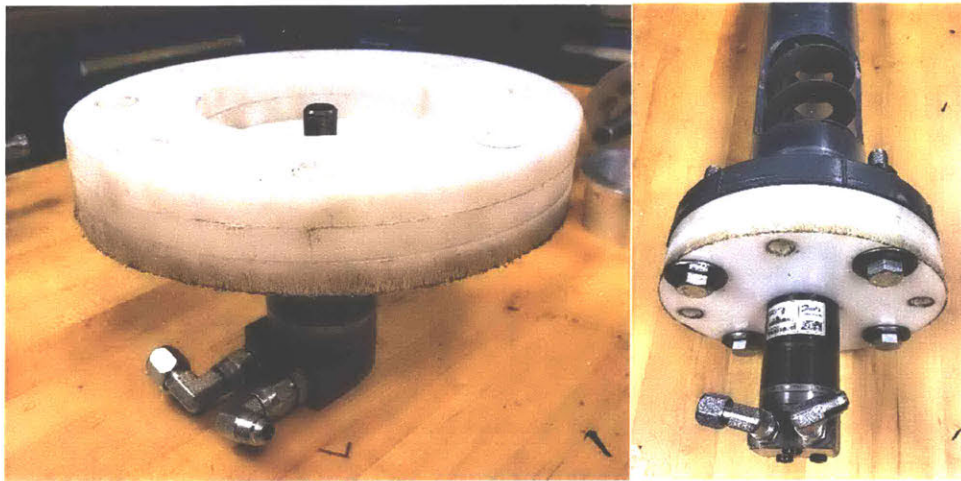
Photographs of the bearing module parts (left) and assembly mounted on the shaft end (right). Once this is assembled on the shaft, the collar is tightened, then the shafted is pushed through the pipe until the outer flange on the aluminum bearing housing makes contact with the end of the pipe. The coupling hub on the right mates with an identical coupling on the motor shaft with a hytel spider as discussed in 3.2 below. When assembled, the bearing spacer is inserted between the collar and bearing to provide a good contact surface to transmit thrust to the bearing.
